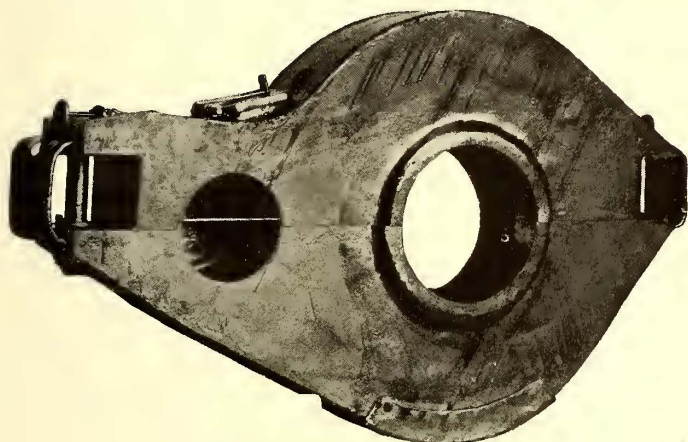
Welded Sheet-Steel Gear Case
